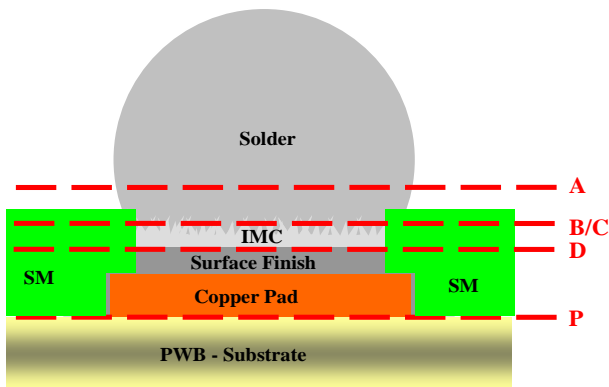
Illustration of ball shear fracture modes and location within the solder ball joint
